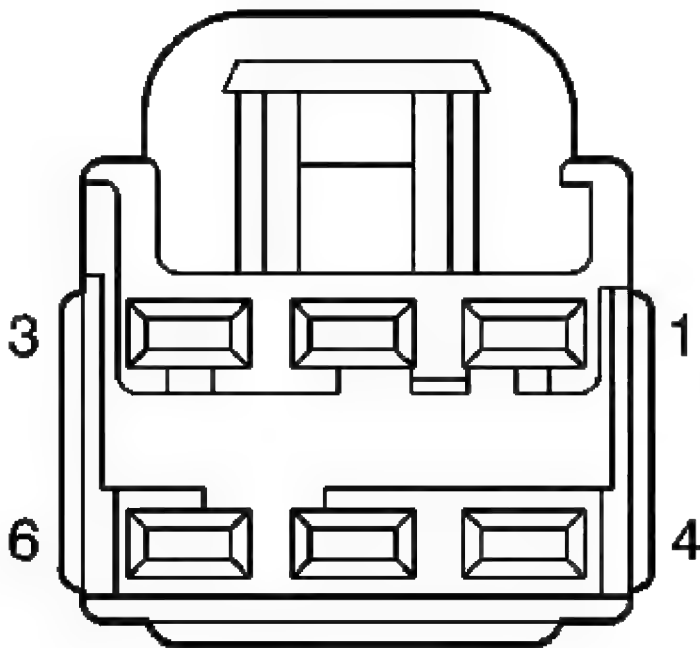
Driver Seat Adjuster Motor Assembly (AE8, A45) Connector End View
